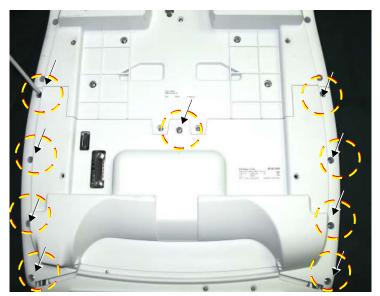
Operating Panel Keyboard Assembly - Bottom Cover Securing Screws
